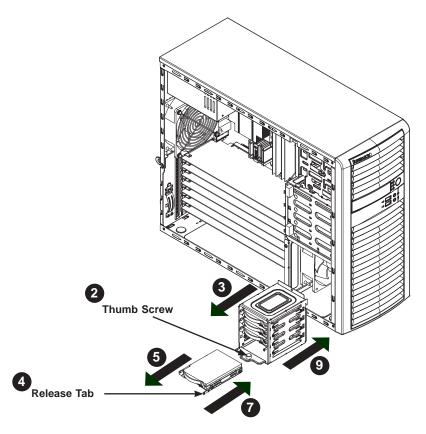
Installing a 2.5" Drive in the Optional Cage
